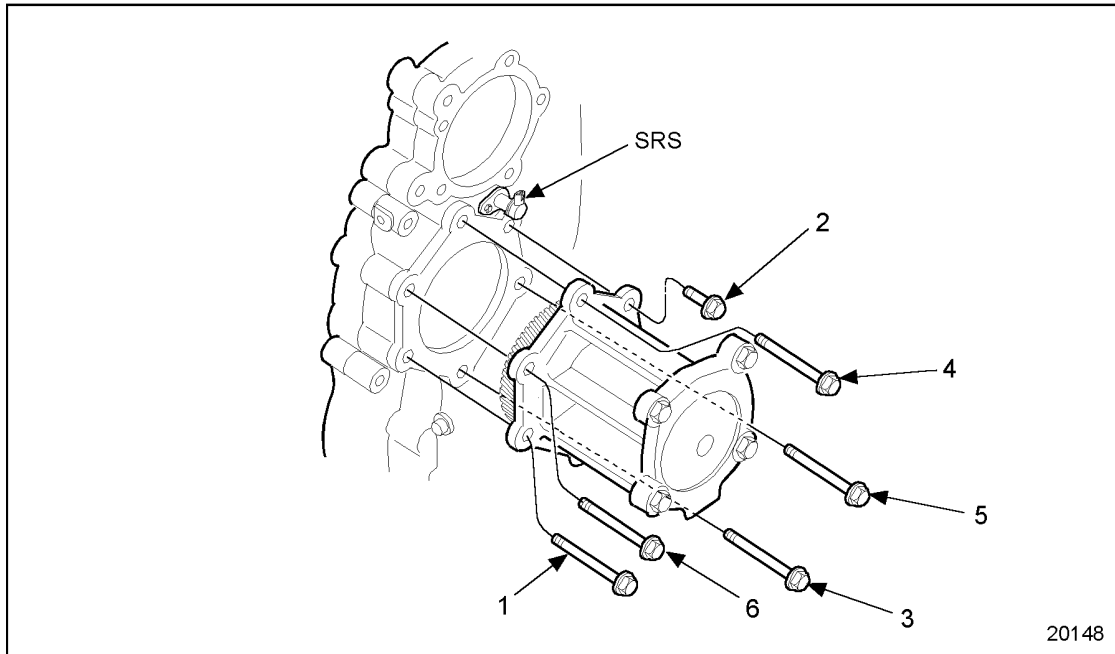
Gear Case Cover Bolt Torque Sequence (Left Rear)
